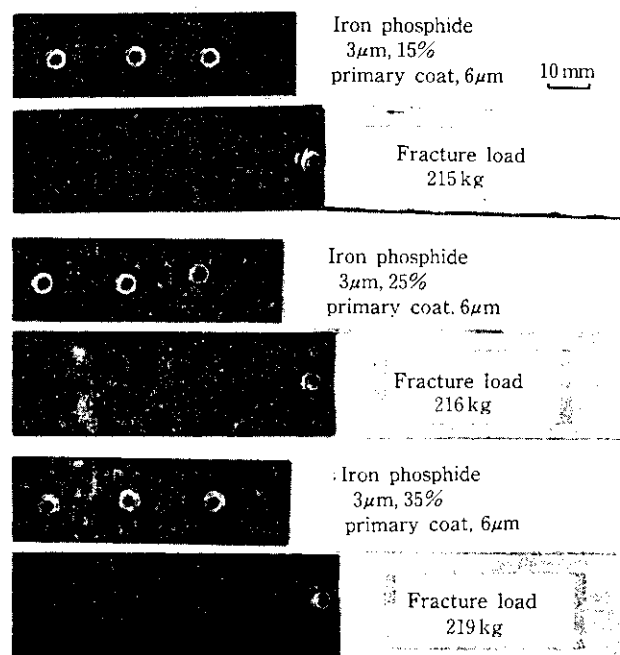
External appearance of nuggets and tensile shear strength of spot welded specimens with different amounts of electrically conductive particle
